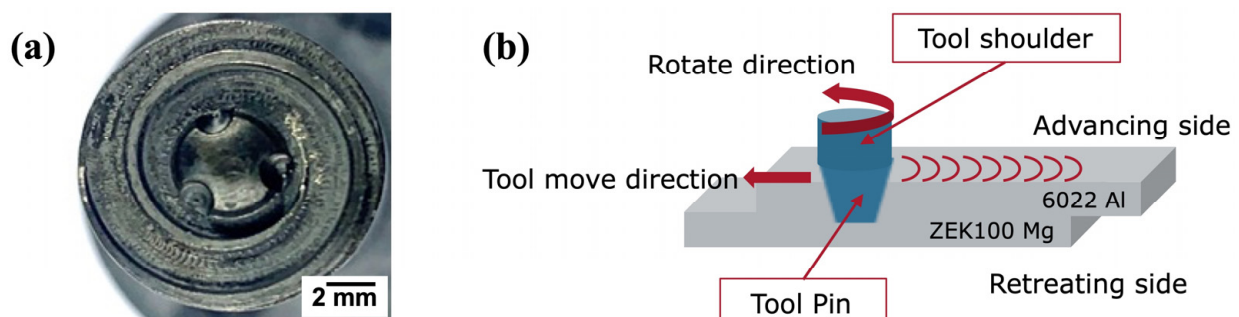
(a) Image of the tri-flute pin with the scrolled shoulder; (b) schematic of friction stir lap welding (FSLW) Al-Mg joint.
